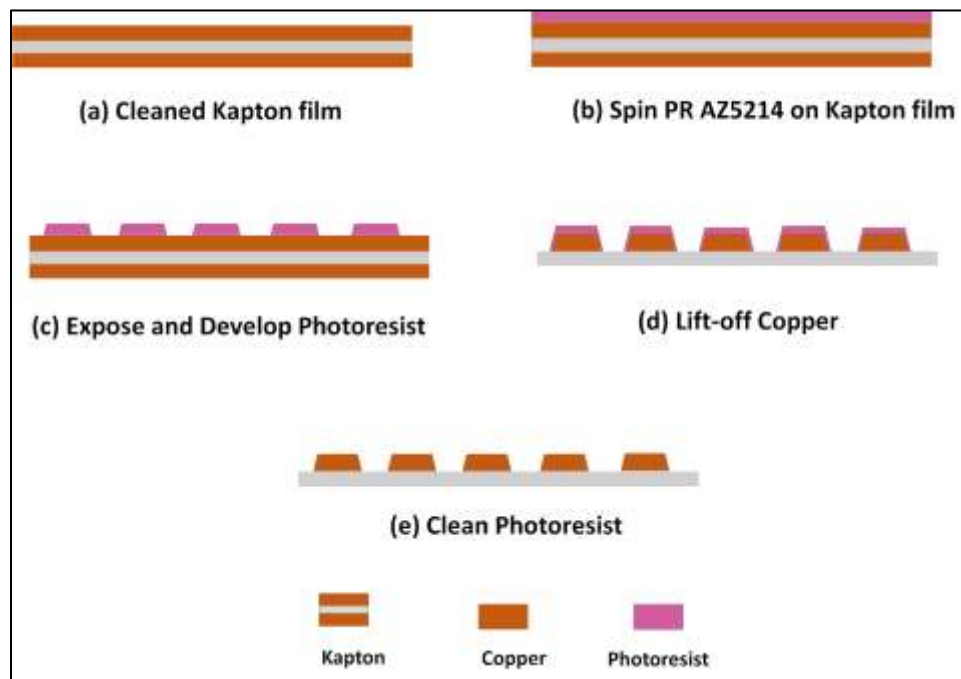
Layer by layer PCB fabrication on Kapton substrate
